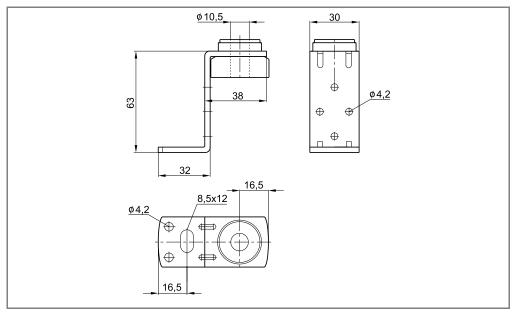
Dimensions of angle brackets in mounting kit 46Z
